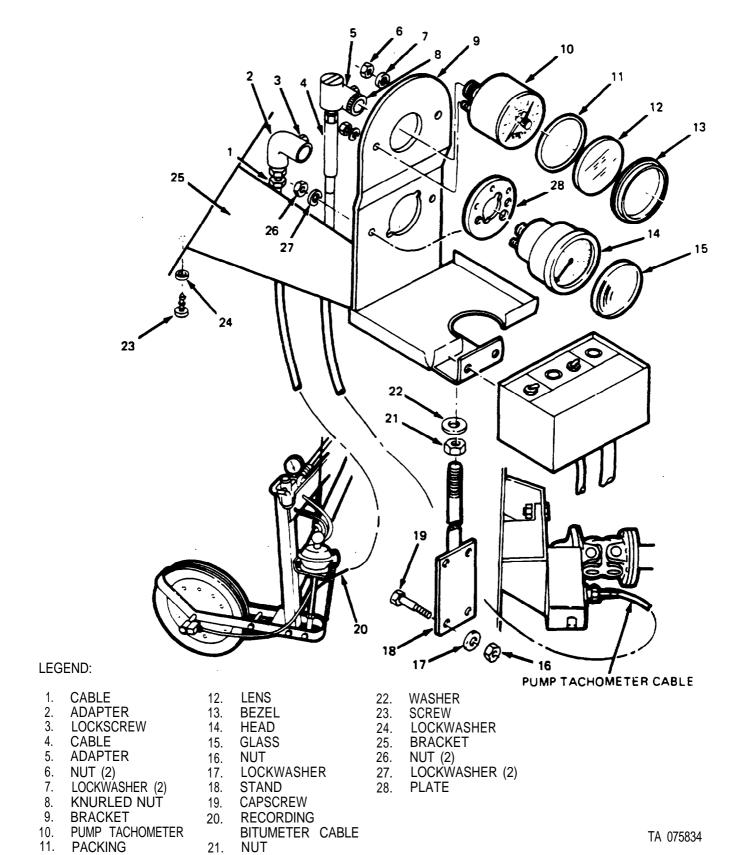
Remove/Install Pump Tachometer, Recording Bitumeter, and Cables.
